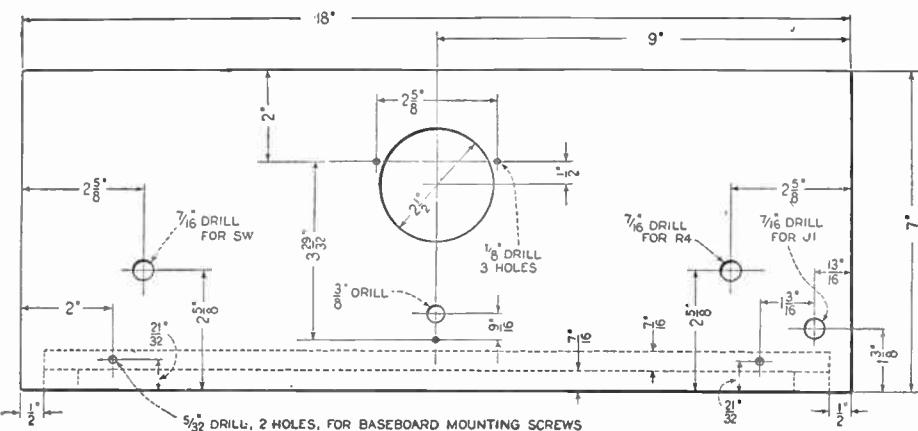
This drilling layout shows the exact location of all holes required for mounting the various parts on the front panel of this receiver.
